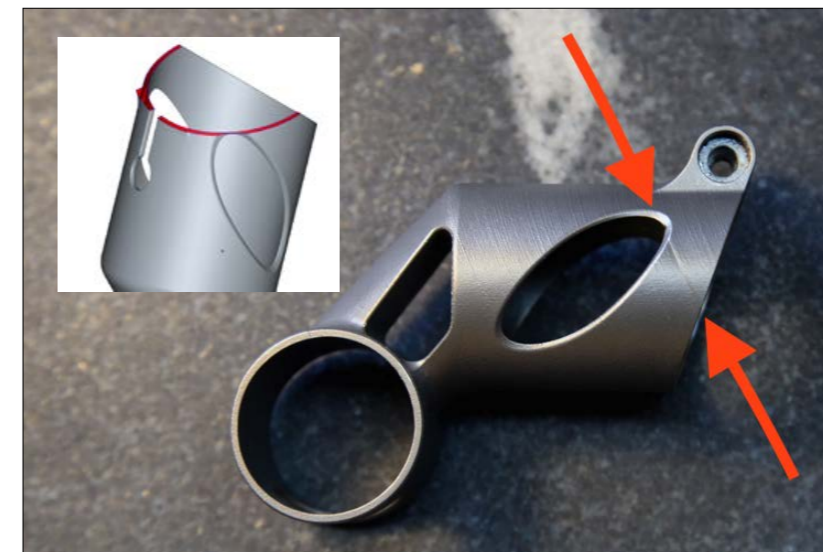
Details of the flaw in Layerwise's first build (Courtesy Spencer Wright and Layerwise/3D Systems)
